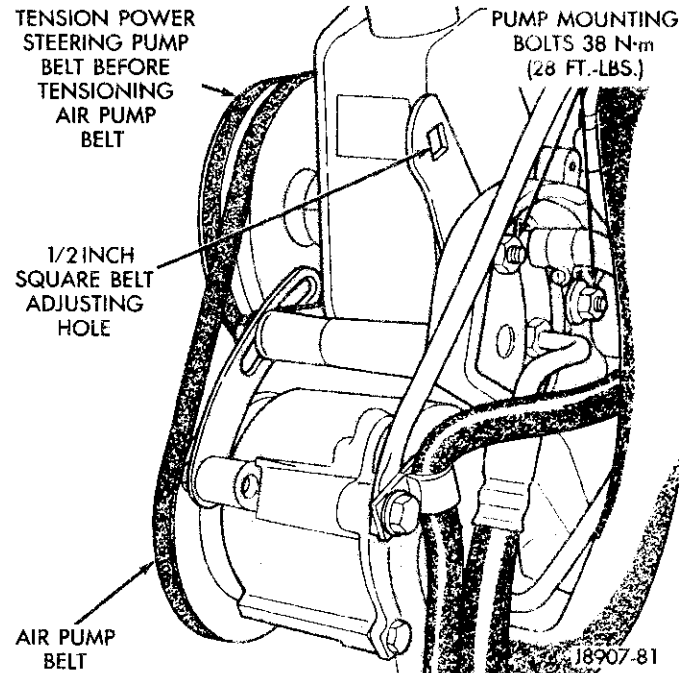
Power Steering Pump Drive Belt Adjustment—5.9L
